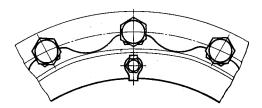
Locking of bolts on cylindrical flange by circular locking plate recessed for bolt heads
